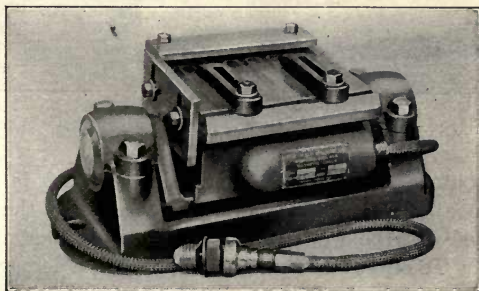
Heald magnetic chuck with adjustable swivel base.
